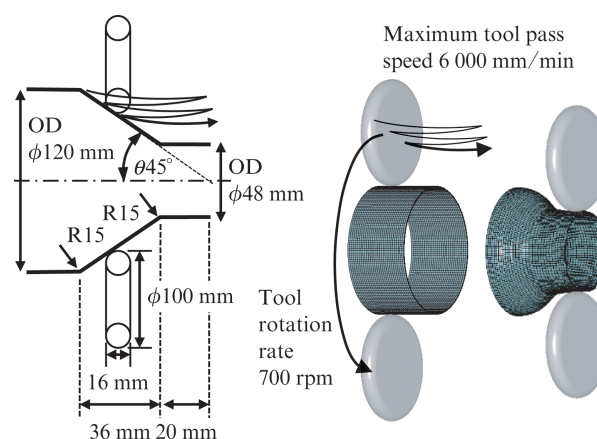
Schematic drawing of configuration of tool rotation type spinning
